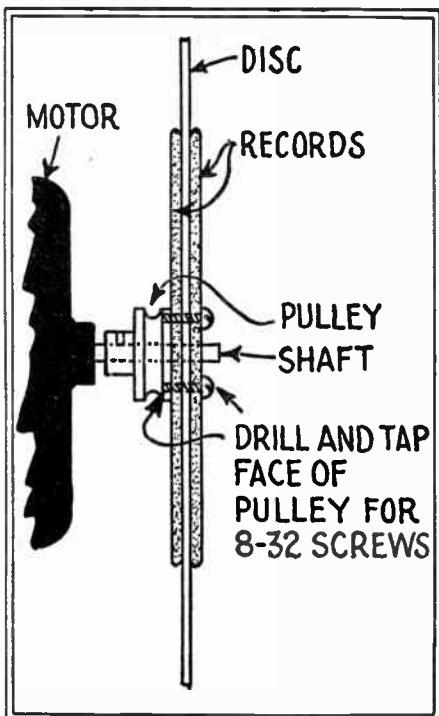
The method of clamping the scanning disc to the fan shaft. It must be centered exactly.
